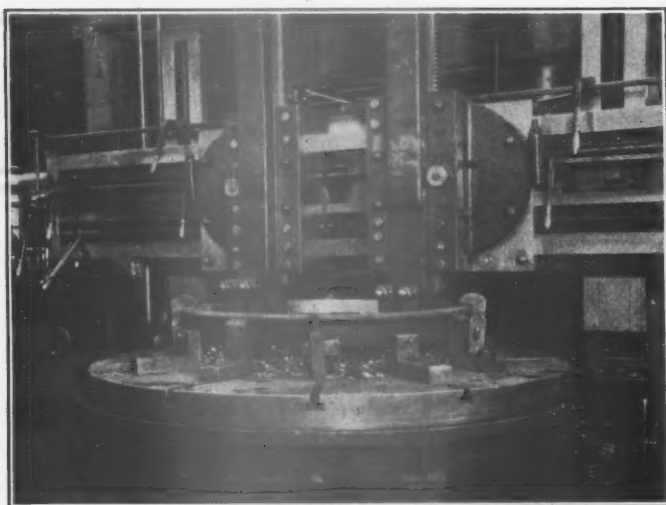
Powerful Holding Fixtures Are Required with Modern Machine Tools
